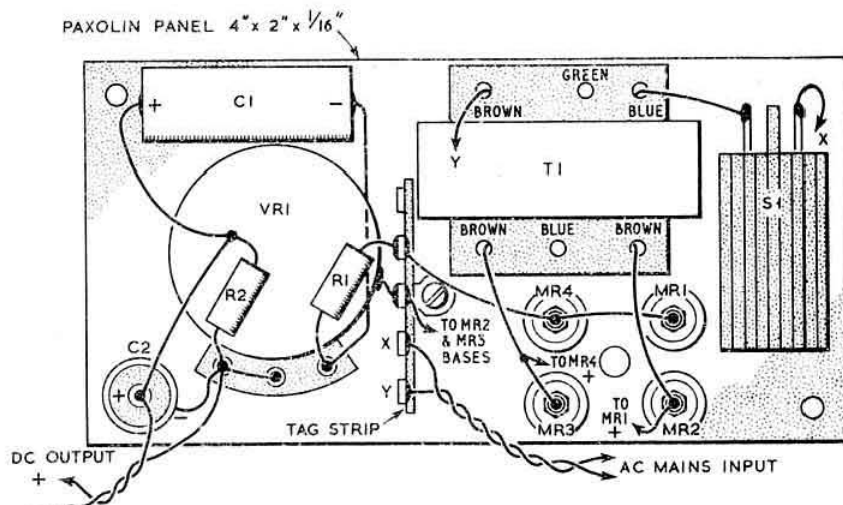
Suggested layout of components on paxolin panel, although any similar layout may of course be used.
